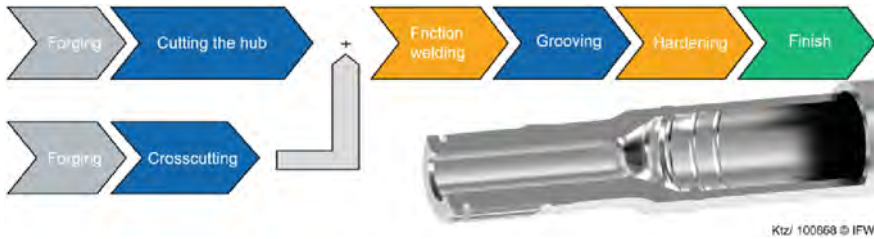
New process chain for the three-part welded lightweight shaft
